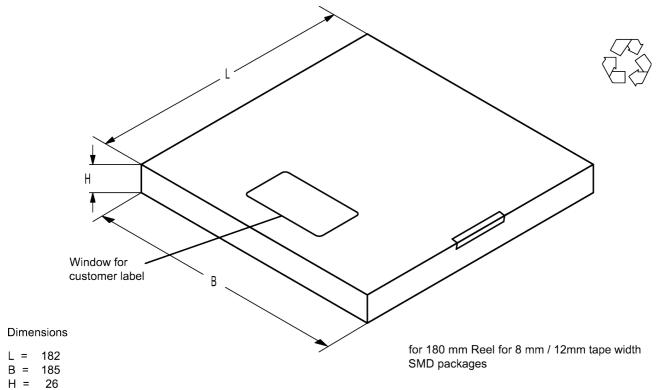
Drawing of folding box for reel with diameter of 180 mm.
